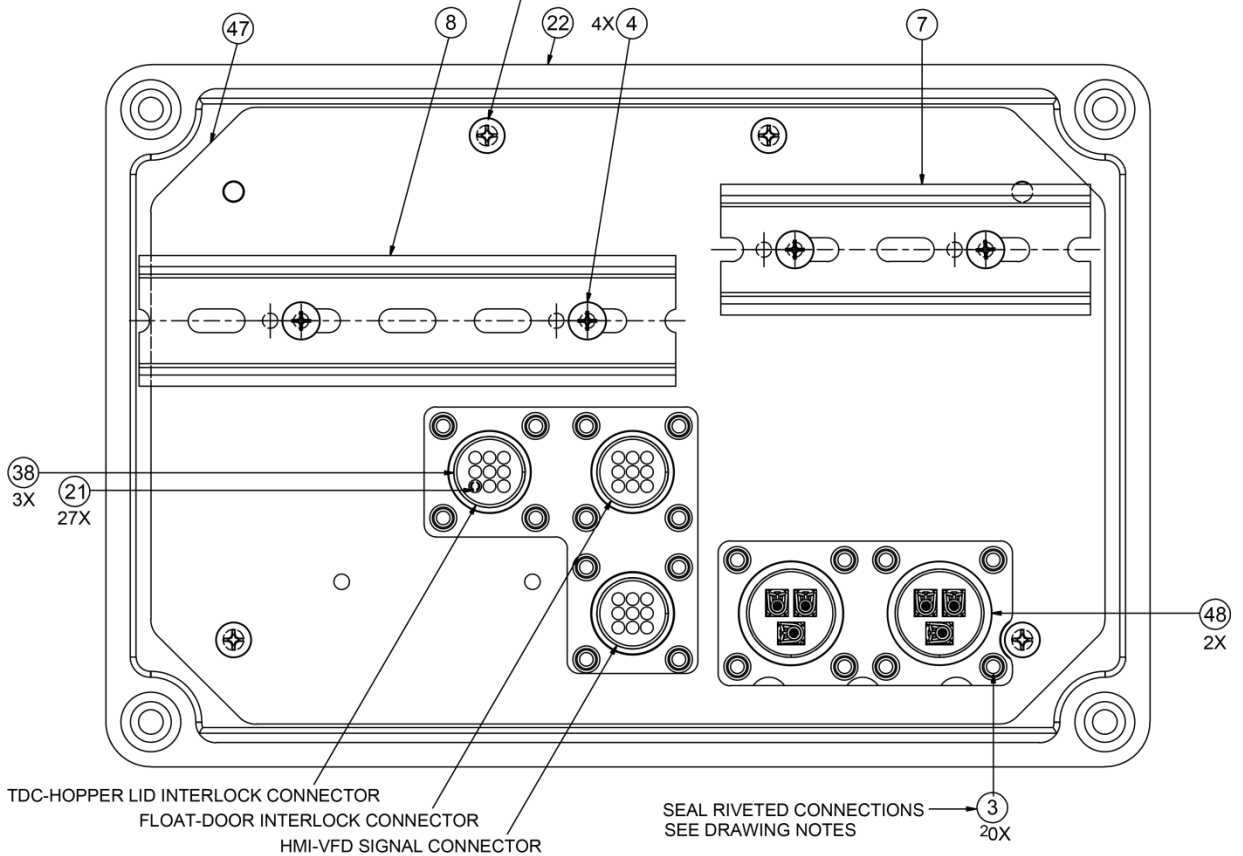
Electrical Panel Assembly (Sheet 1 of 2)
